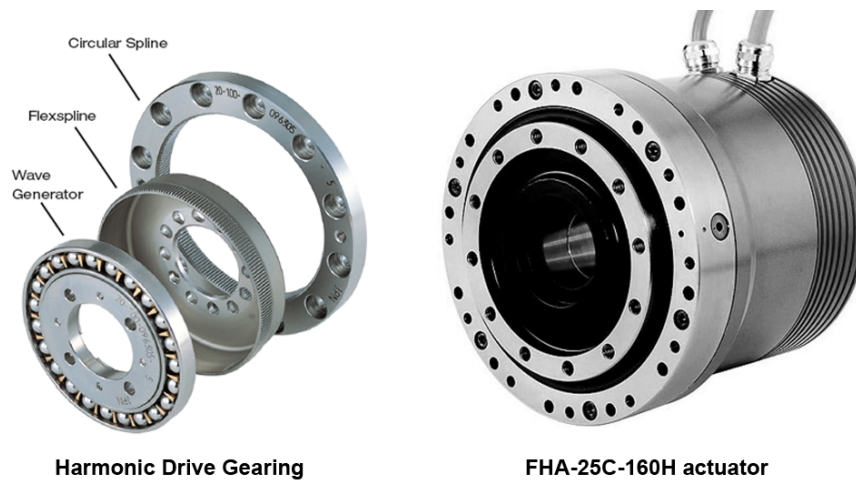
The harmonic drive gearing technology (left) and the FHA-25C-160H actuator(right).
